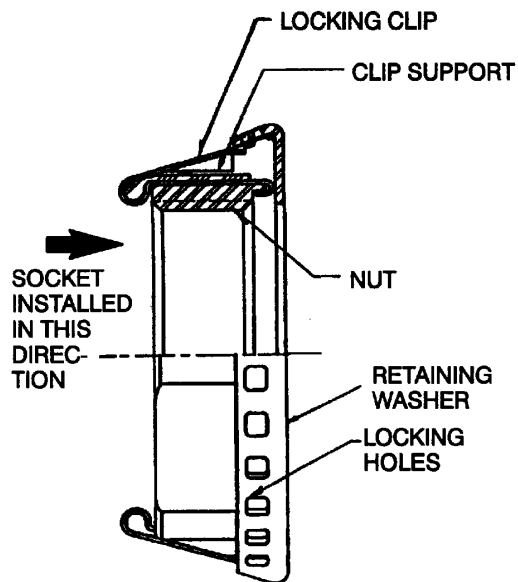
Axilok Unitized Self-Locking Wheel Bearing Adjusting Nut
